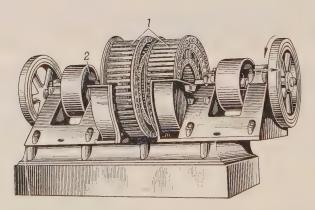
Disintegrator (with shafts drawn apart and shell partially removed):
